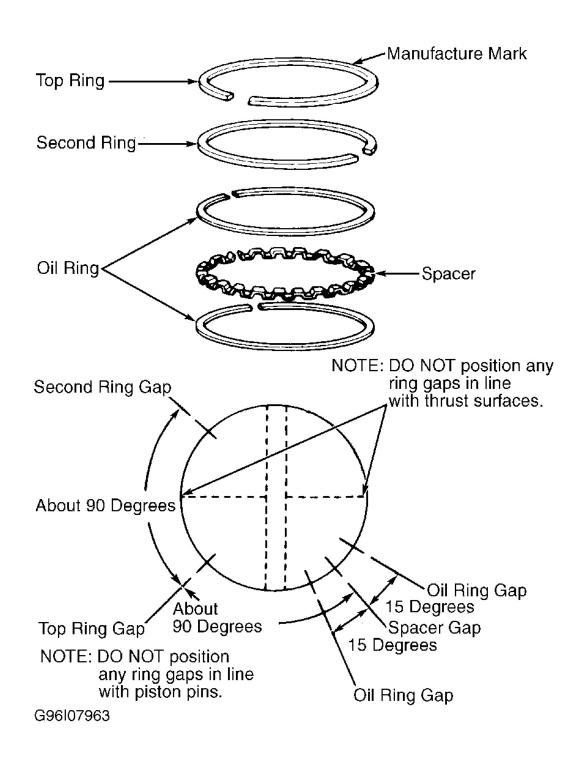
Installing Piston Rings Courtesy of AMERICAN HONDA MOTOR CO., INC.
